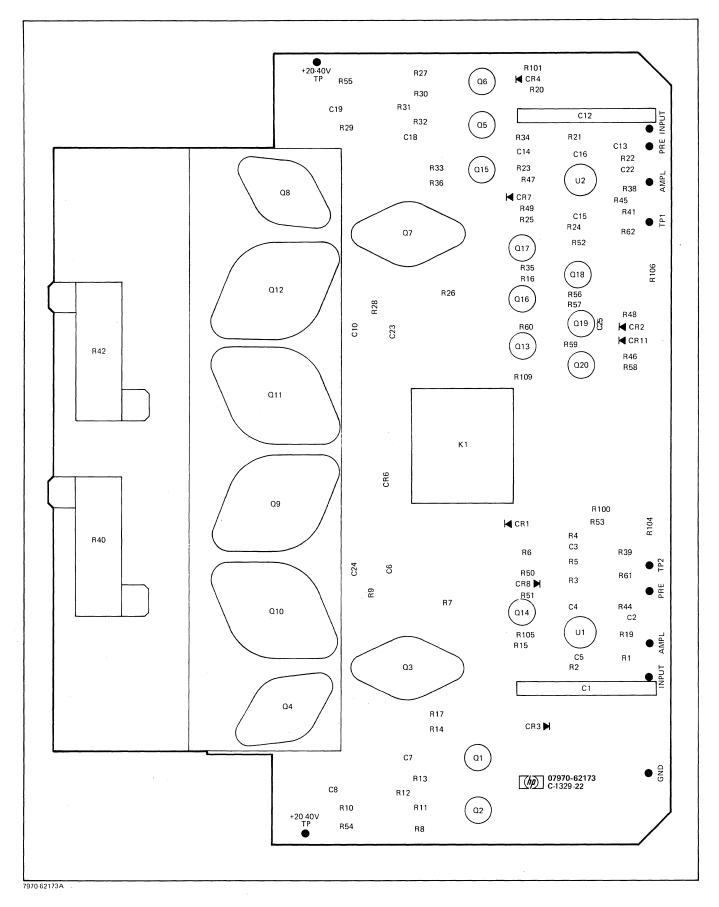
Reel Servo PC Assembly A7 (Sheet 1 of 2)
